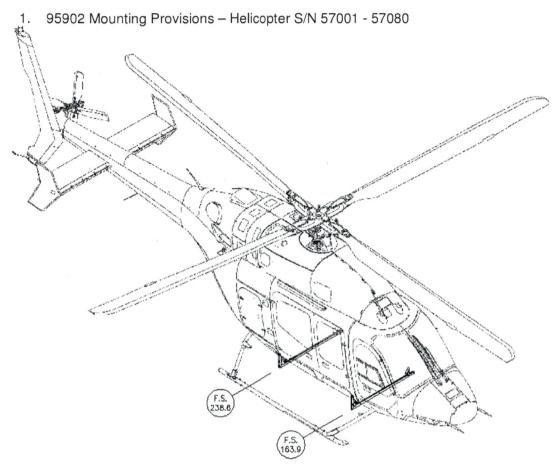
Mounting Provisions Installation (95902 Configuration)
